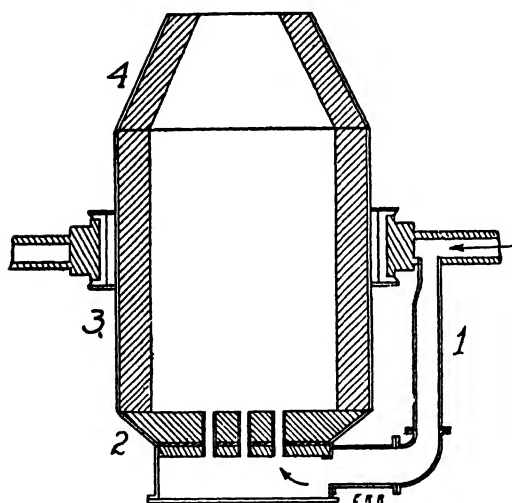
The Bessemer converter for steel; 1, entry for air blast, cold; 2, bottom piece; 3, body; 4, nose piece of the converter. The tuyeres are shown in 2.
